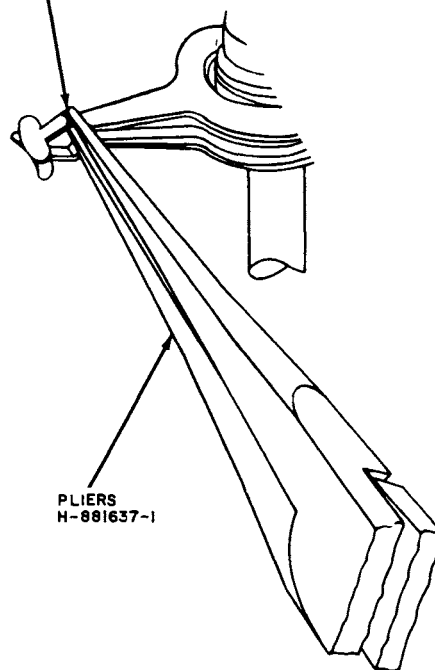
Adjusting Wiper Tip Clearance and Alignment.
